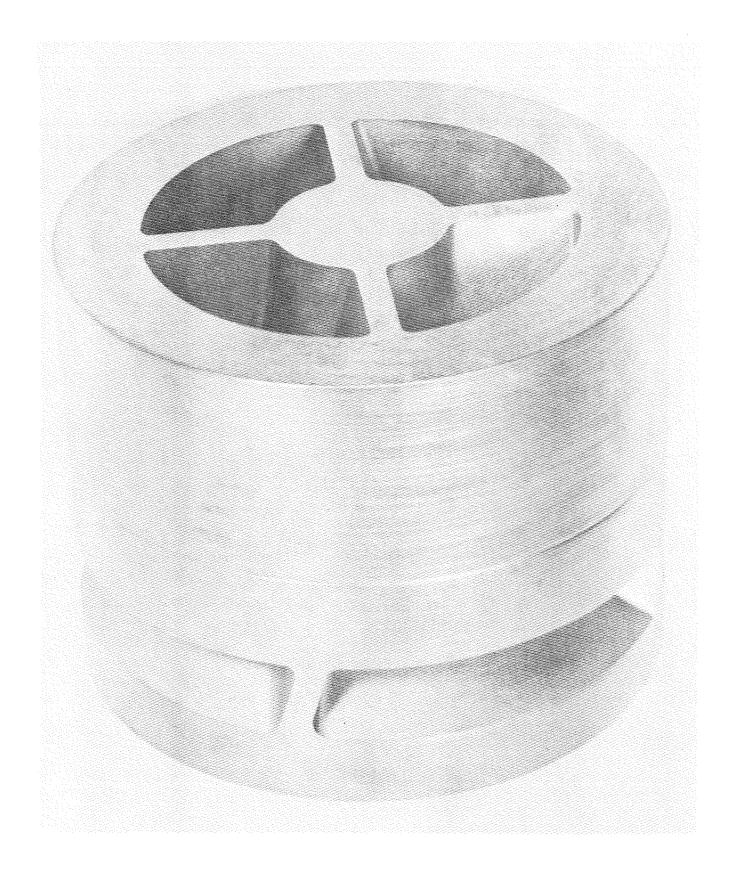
Final Simulated Impeller Sample Showing Inlet and Discharge Area After Core Removal
